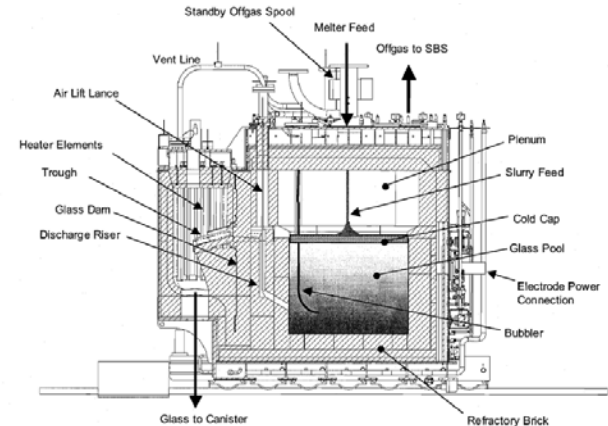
HLW Melter Sectional View along North-South Axis at Discharge Riser
